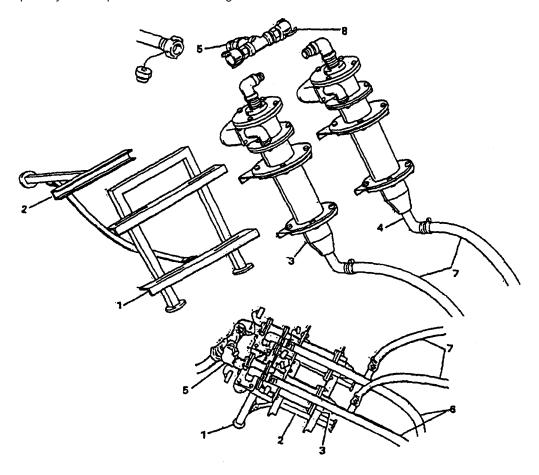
Set-Up Cyclone Separator (Sheet 1 of 2) (MODEL WTA-060 ONLY)
